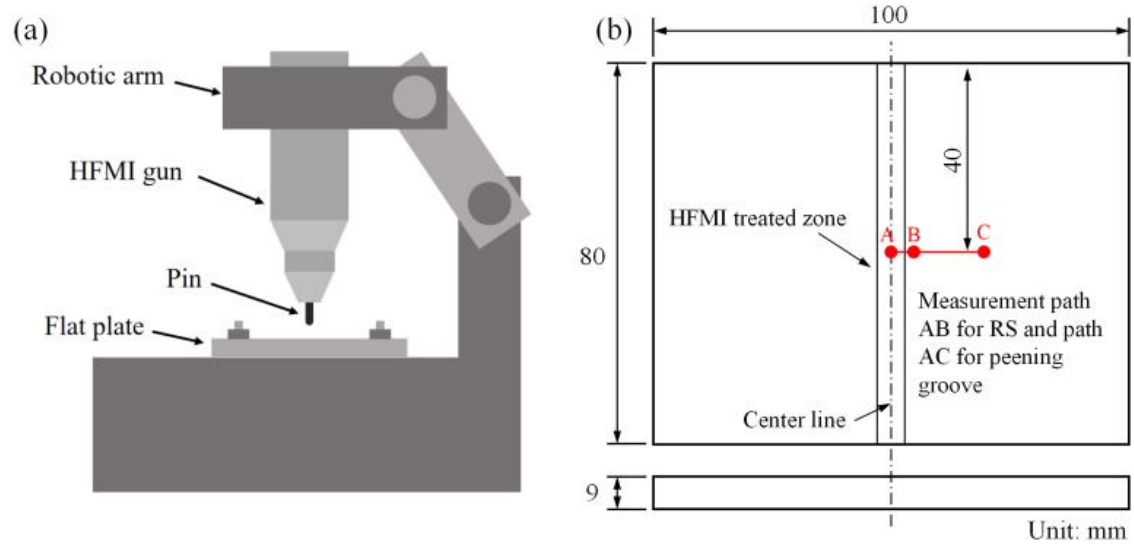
(a) HFMI equipment, (b) geometry of flat plate specimen.
